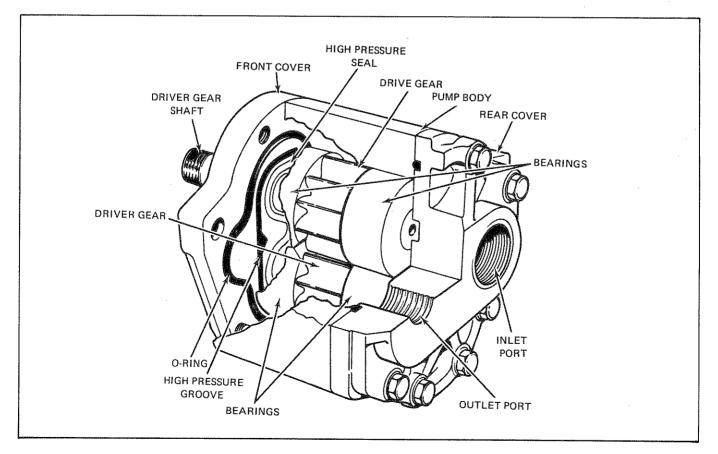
Hydraulic Pump Assembly, Location of Components
